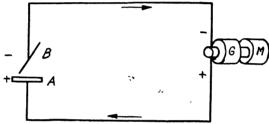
Metallic arc circuit: A. Metal being welded, B. Electrodes, G. Generator, M. Motor
